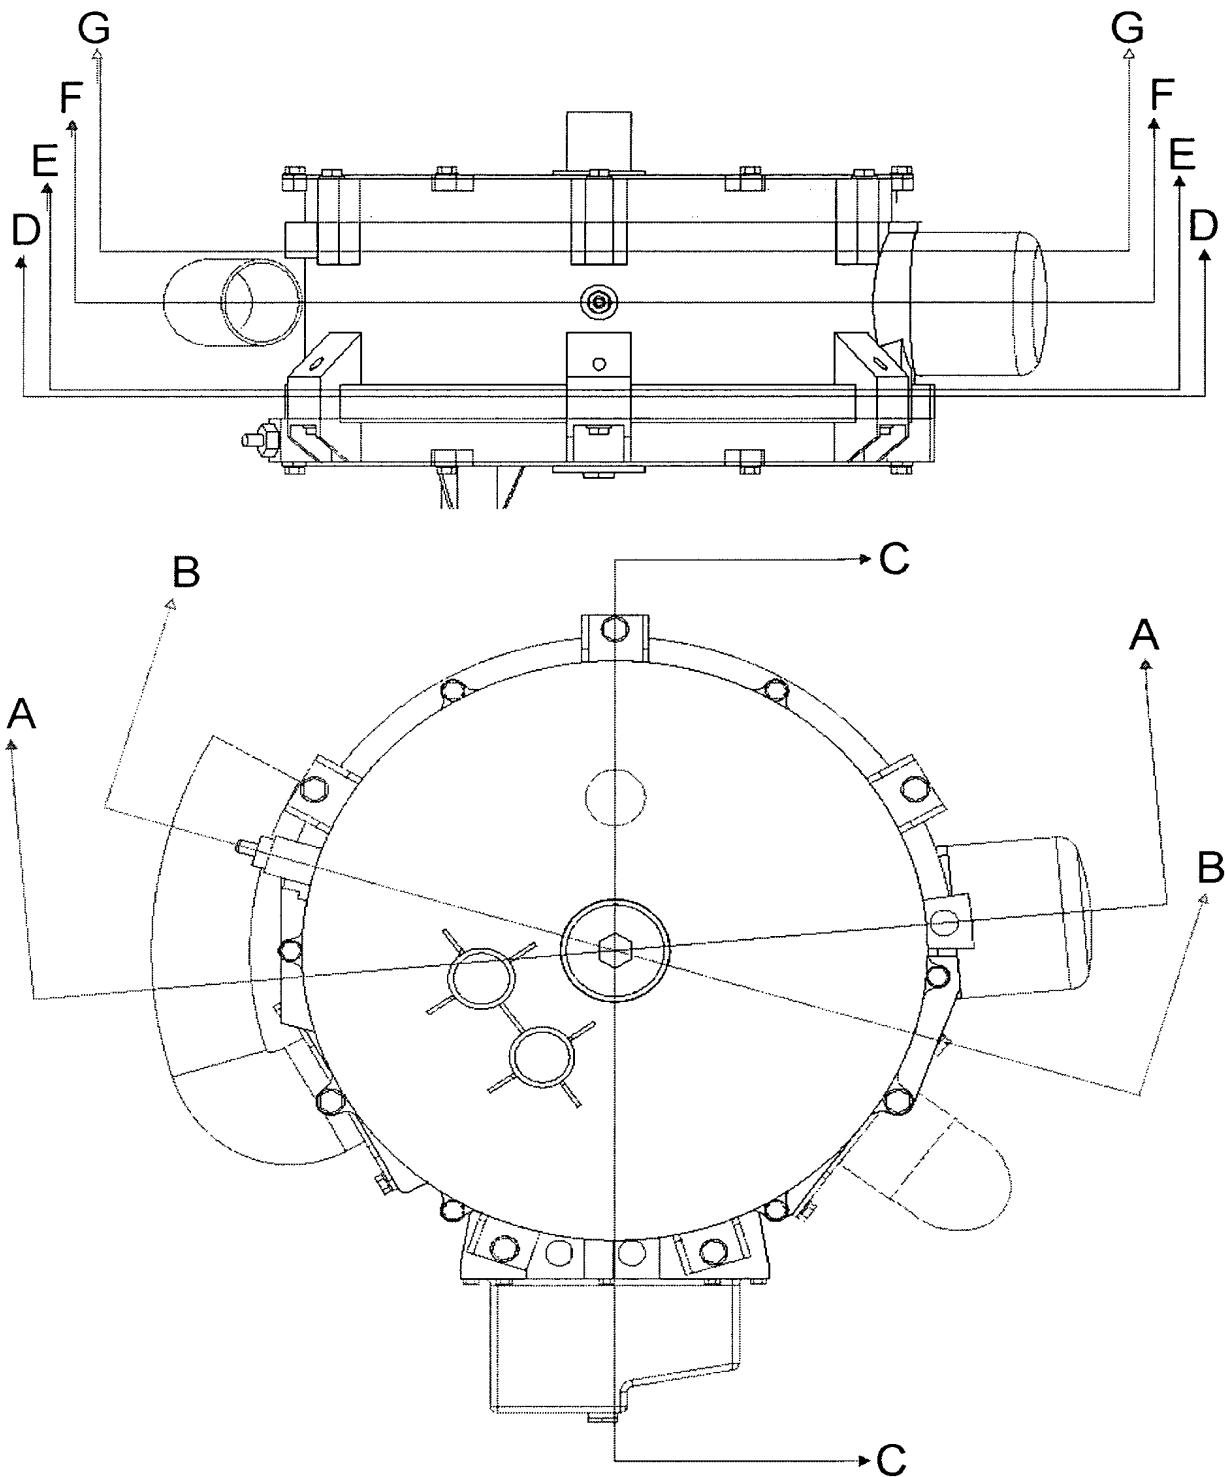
FRONT AND TOP VIEW OF ENGINE
